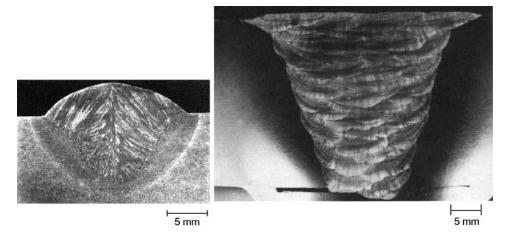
Weld microstructures showing the fusion zone, heat-affected zone, and base metal for (a) single-pass bead-on-plate weld in A-710 steel and (b) multipass weld in 304 stainless steel. Source: Ref 1.3
